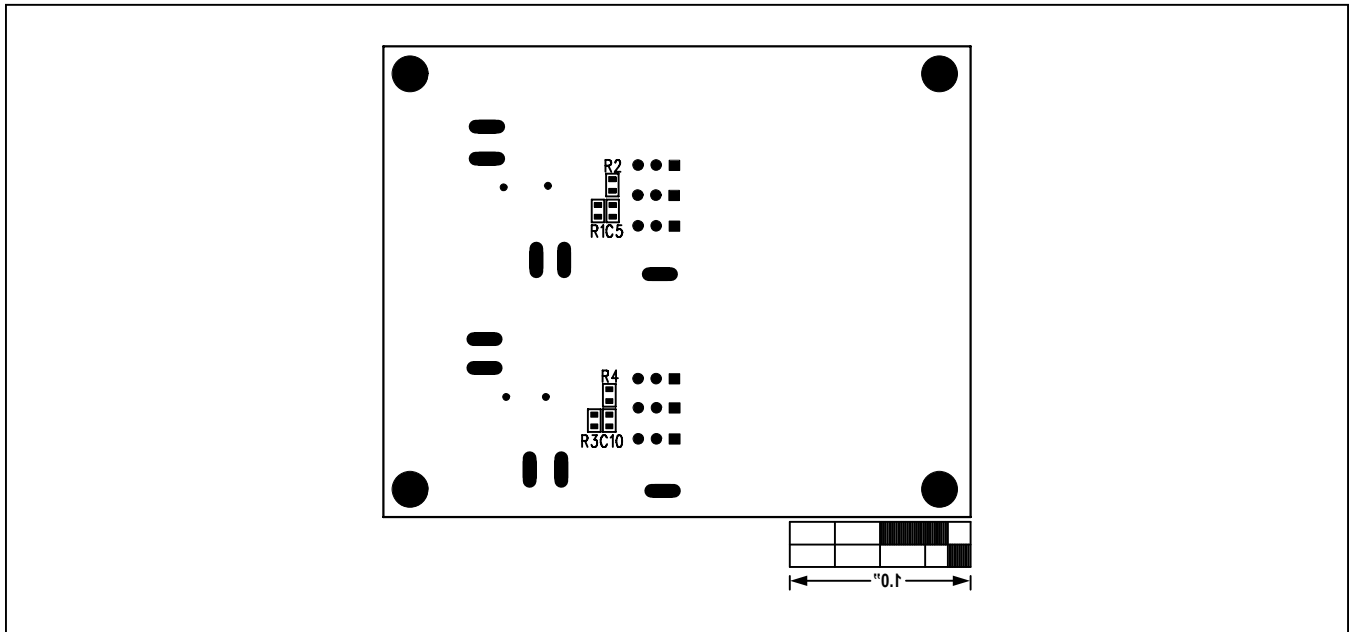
MAX1556 EV Kit Component Placement Guide—Solder Side
